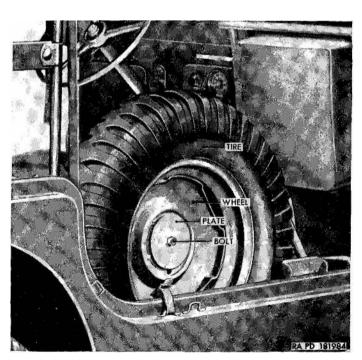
(Added) Spare wheel and tire assembly M170—installed.
